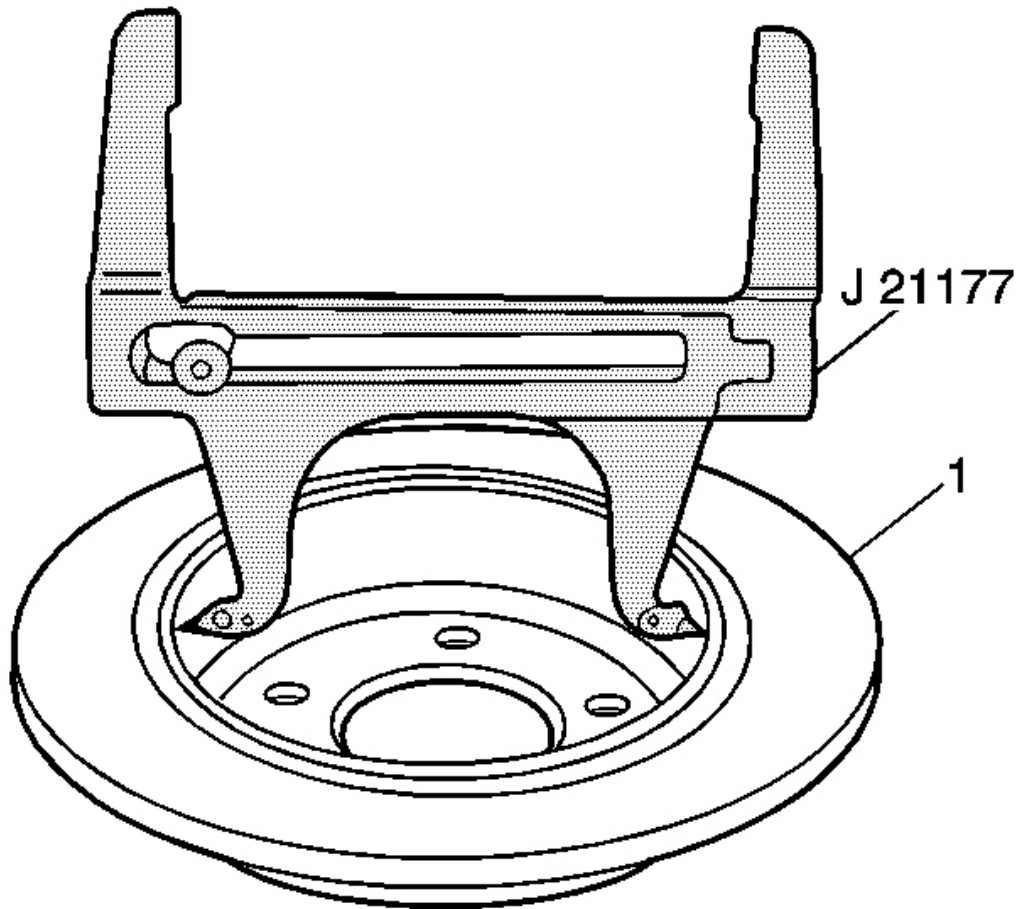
Applying J 21177-A To Inside Of Brake Drum
